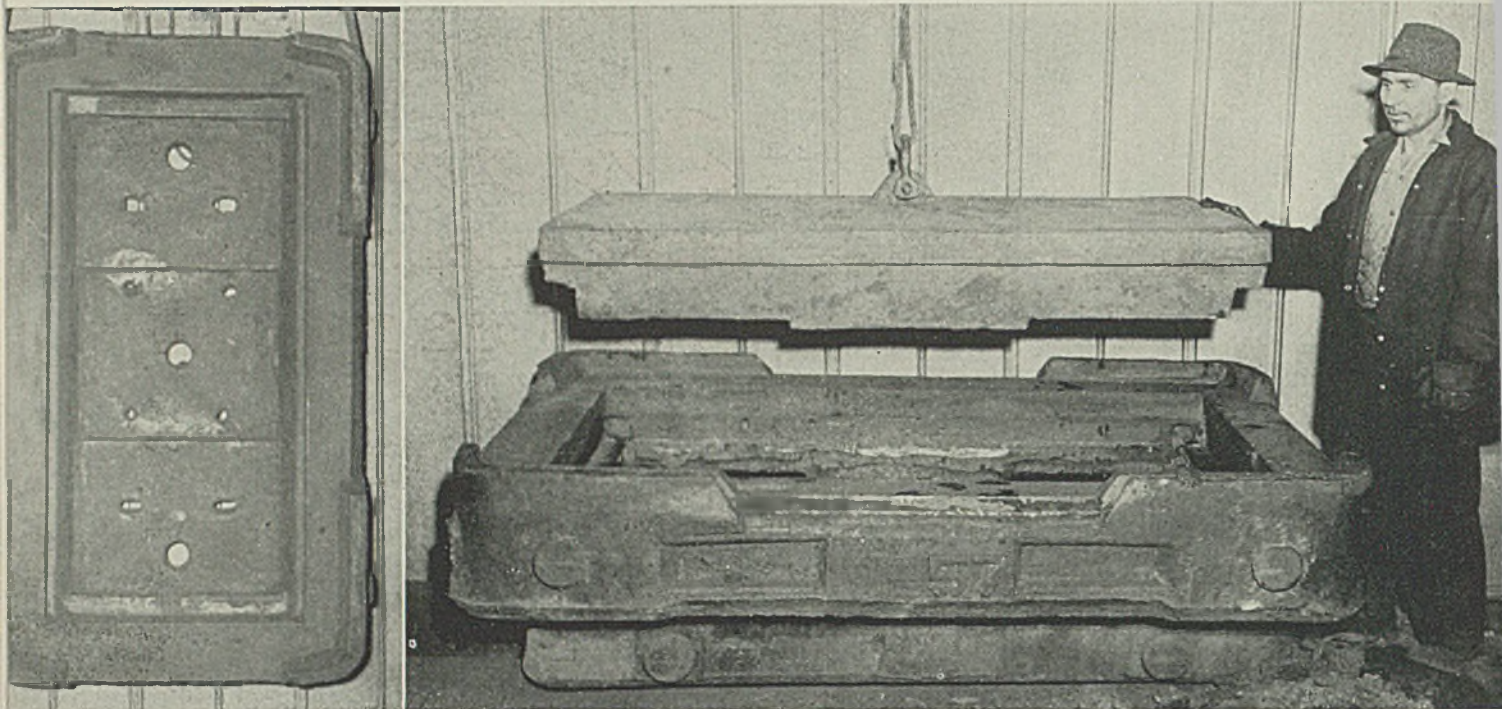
(Upper left)—Cast-steel mold stool or keeper into which a cast-iron insert is poured. Fig. 2. (Upper right)—Cast-iron insert about to be lowered into the outer mold stool frame
